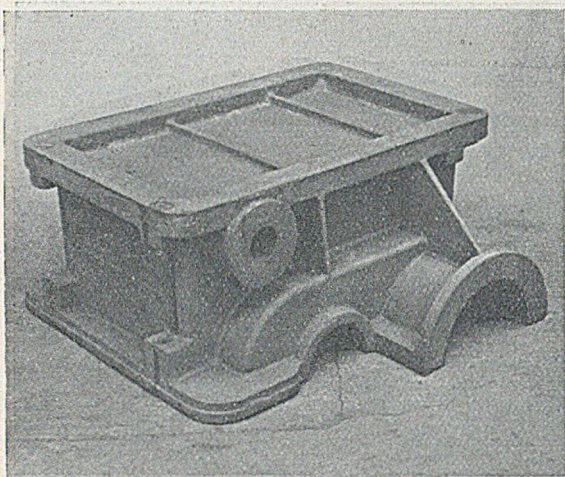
Small Gear-case Casting weighing  $8\frac{1}{2}$  cwt.
